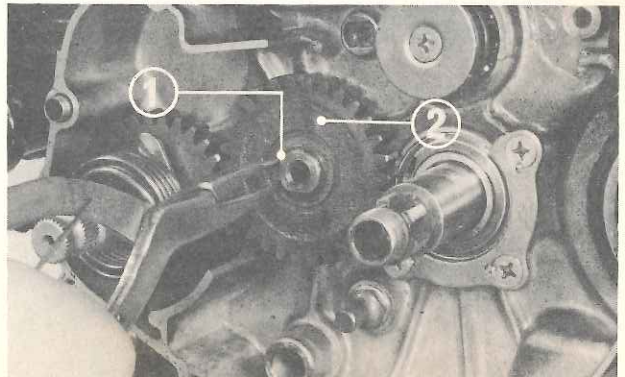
(1) 17 mm snap ring (2) Starter idle gear
